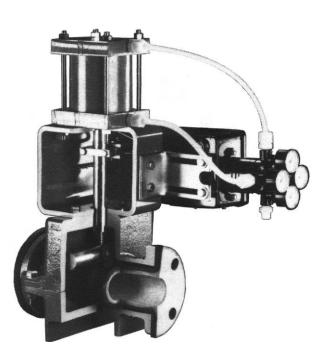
Mechanically operated unsupported sleeve pinch control valve -- open version
